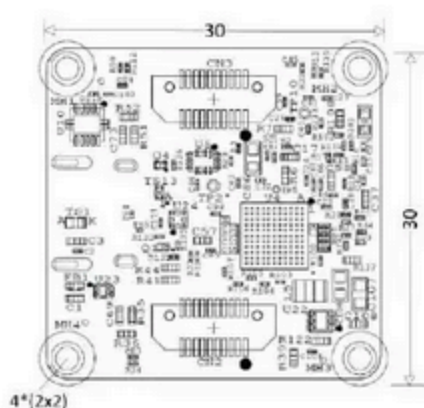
See3CAM_MIPI_BASE15_H01R1 Top view Mechanical Dimensions
